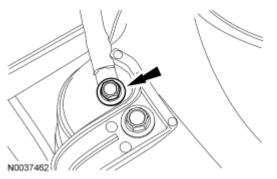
Locating Ground Wire And Bolt Courtesy of FORD MOTOR CO.
